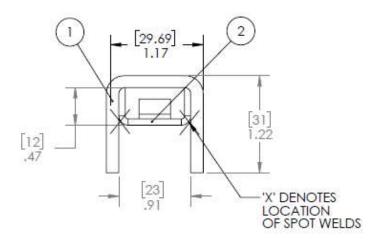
TOP AND BOTTOM RAIL ASSEMBLY
